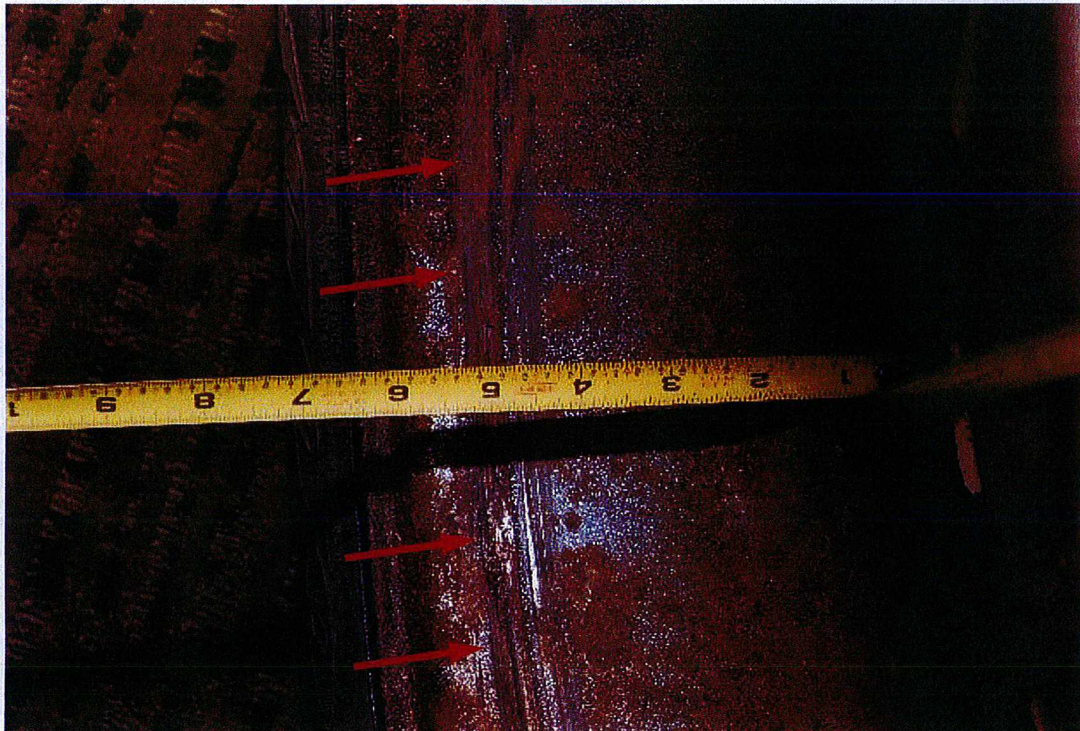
Witness marks observed on the internal surface of the wheel rim consistent with rotor contact.
